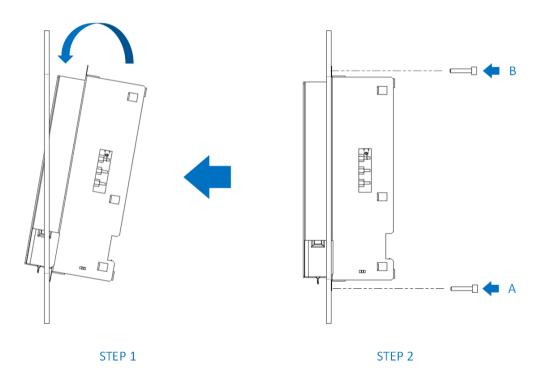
Mechanical Mounting of a Drive Recessed Mount
